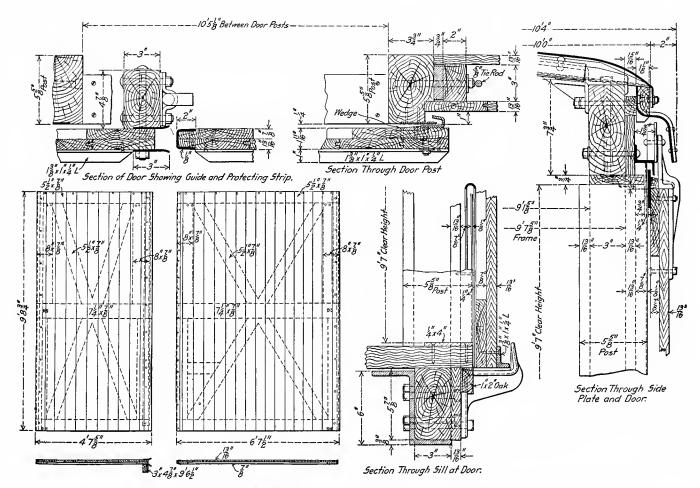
Side Door for Chicago, Milwaukee & St. Paul Automobile Car Shown in Figs. 282, 283 and 284.
